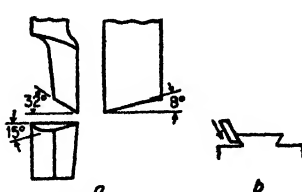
Tool No. 16. (a) Left-hand dovetail side-cutting finishing tool for cast iron; (b) Application of the tool. (The G. A. Gray Company)
